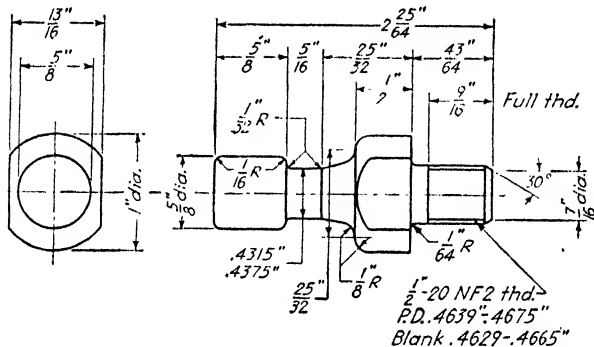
A part of this shape is readily blanked by cold heading but the necked portion has to be turned subsequent to heading and the flats on largest diameter are trimmed. Despite these supplementary operations, the part costs less and requires less material than if produced by screw machine from alloy steel.
